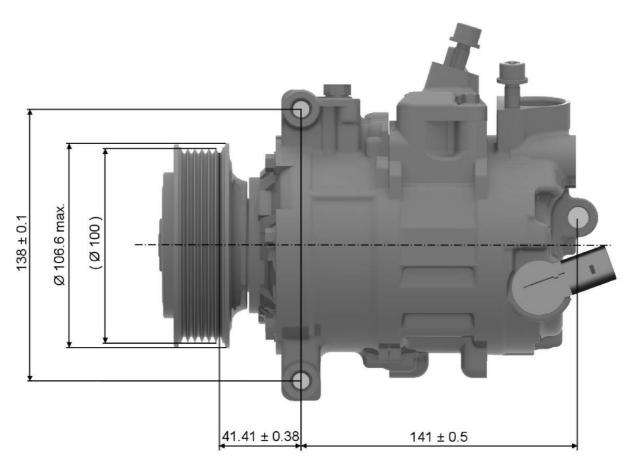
Dimensions of air-conditioning compressor, pulley diameter 100 mm (side view)
